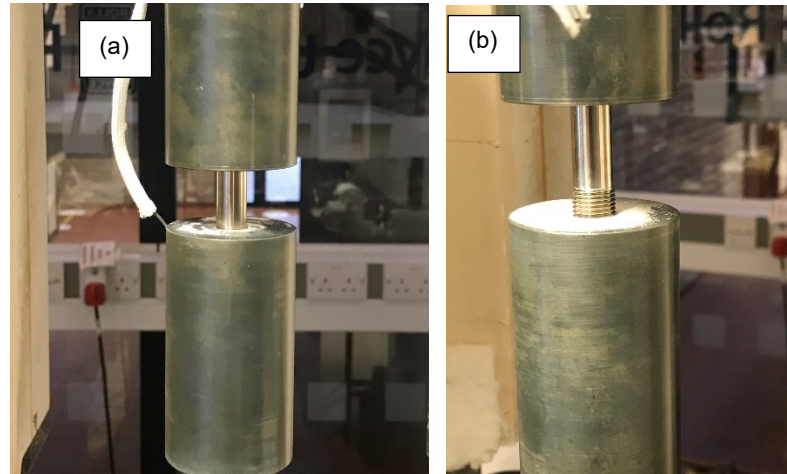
(a) Fully screwed bolt and (b) partially screwed bolt on the fixture
